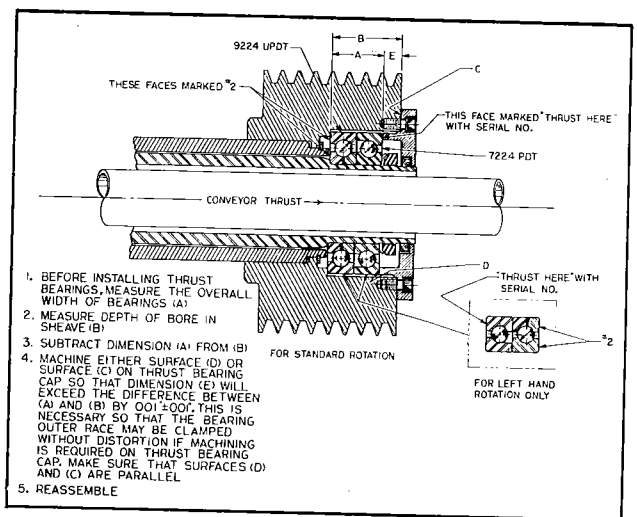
Thrust bearing assembly having split inner race and angular contact bearings
